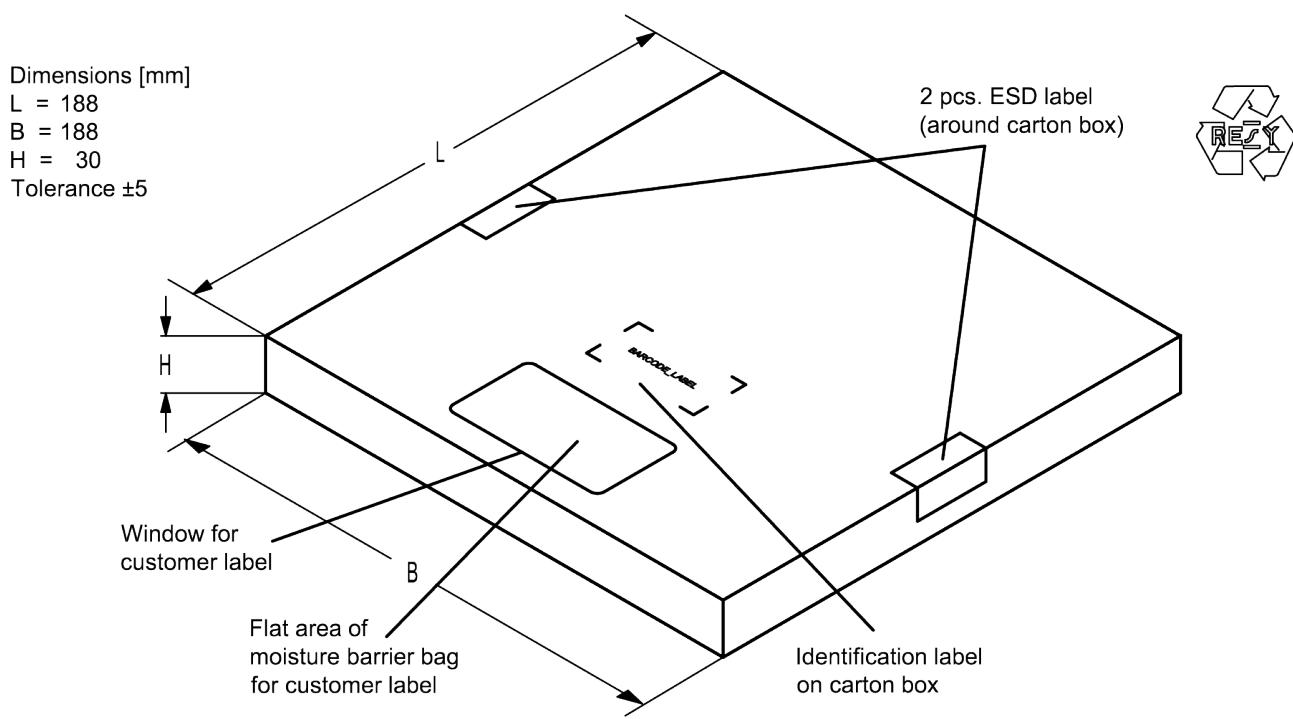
Drawing of folding box for reel with diameter of 180 mm.
